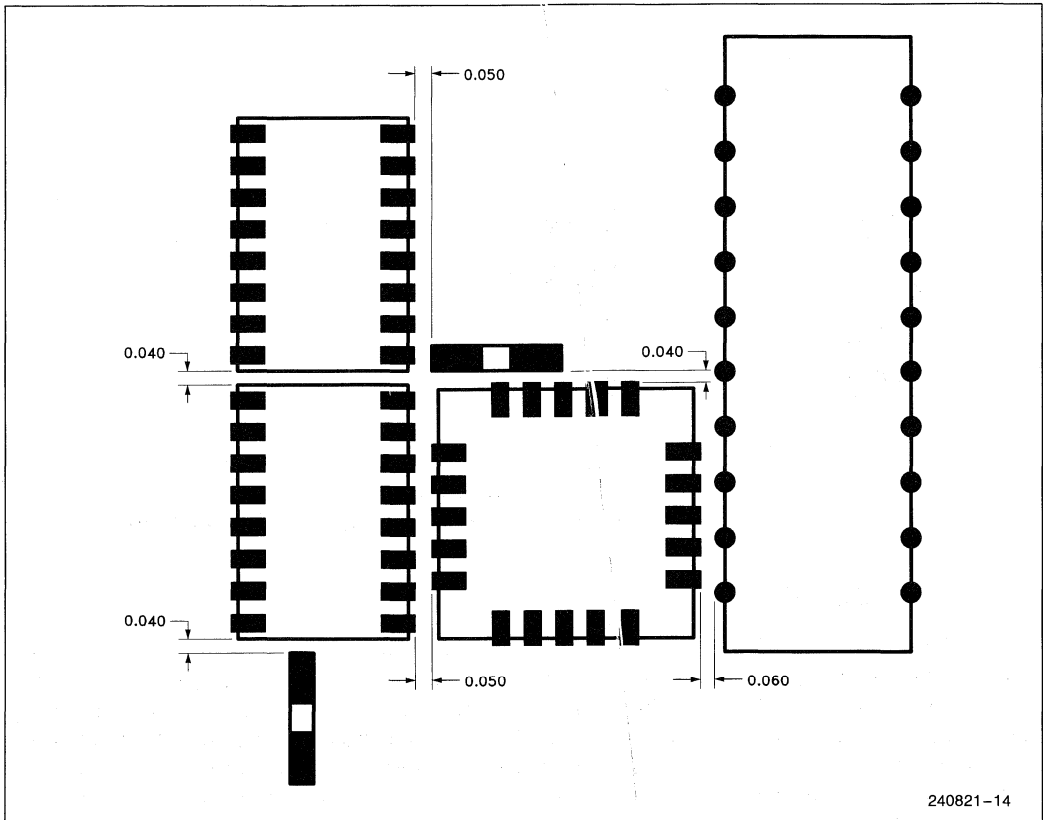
Minimum Land-to-Land Clearance between Component (Surface Mount and DIP) Lands
